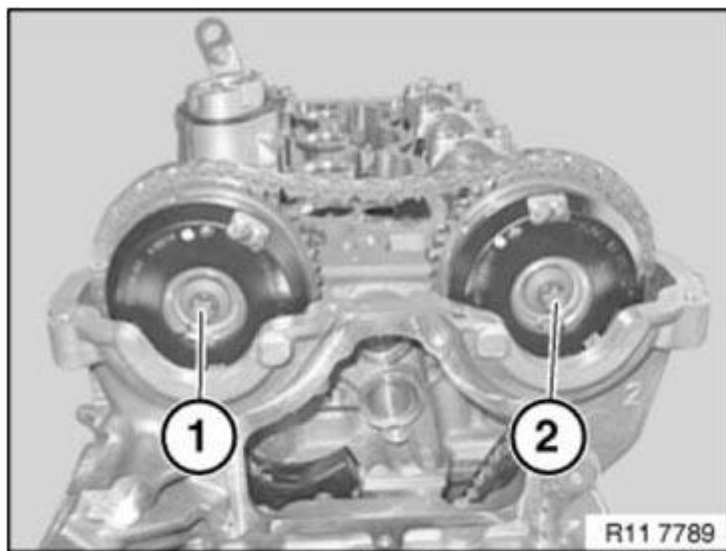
Identifying Central Bolts Of Intake And Exhaust Camshaft Adjusters
